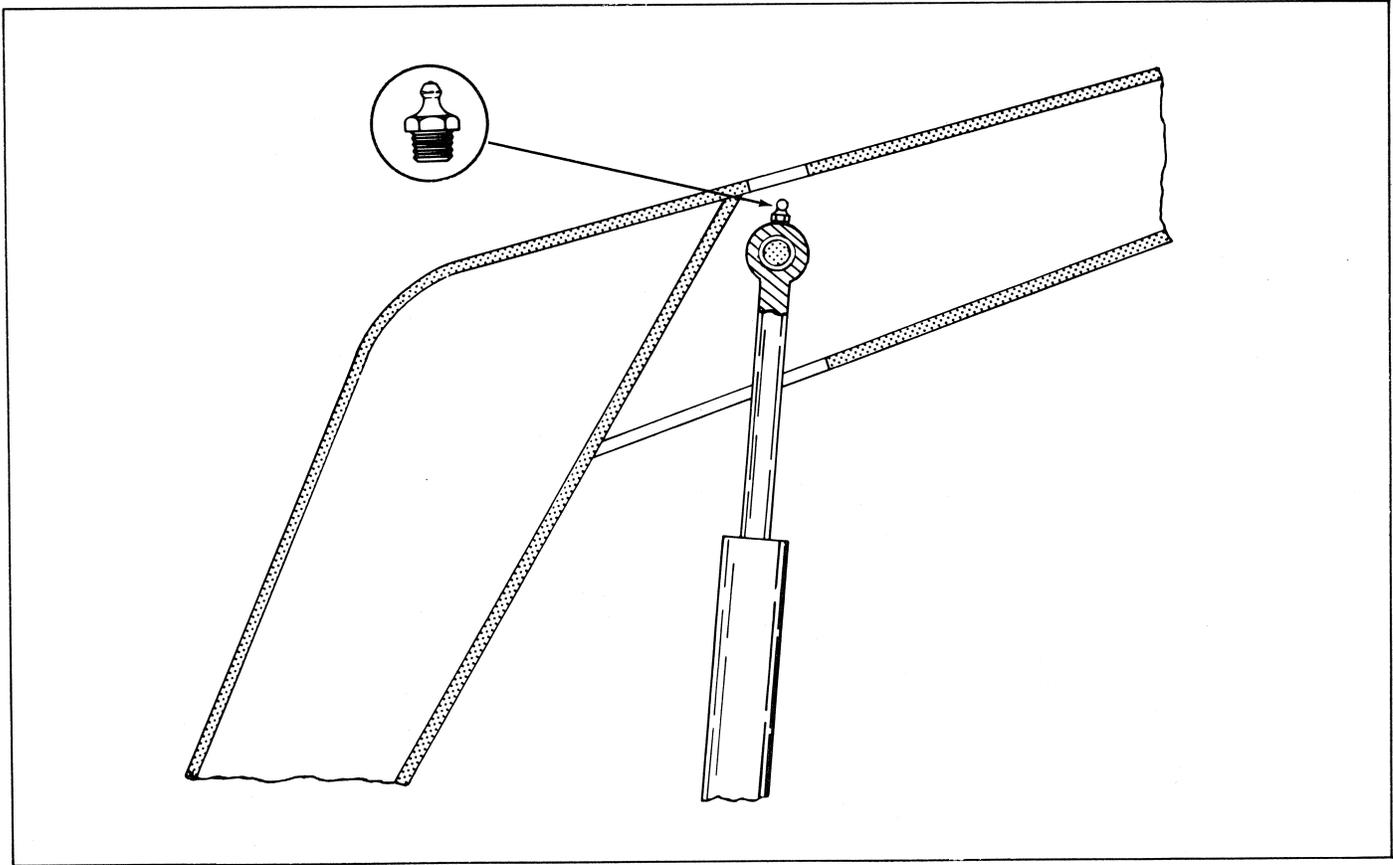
Grease Fitting on Rod End of Hoist Cylinder.
